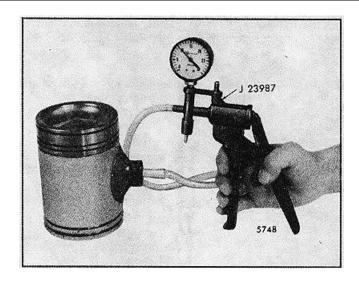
Checking Piston Pin Retainer for Proper Sealing
